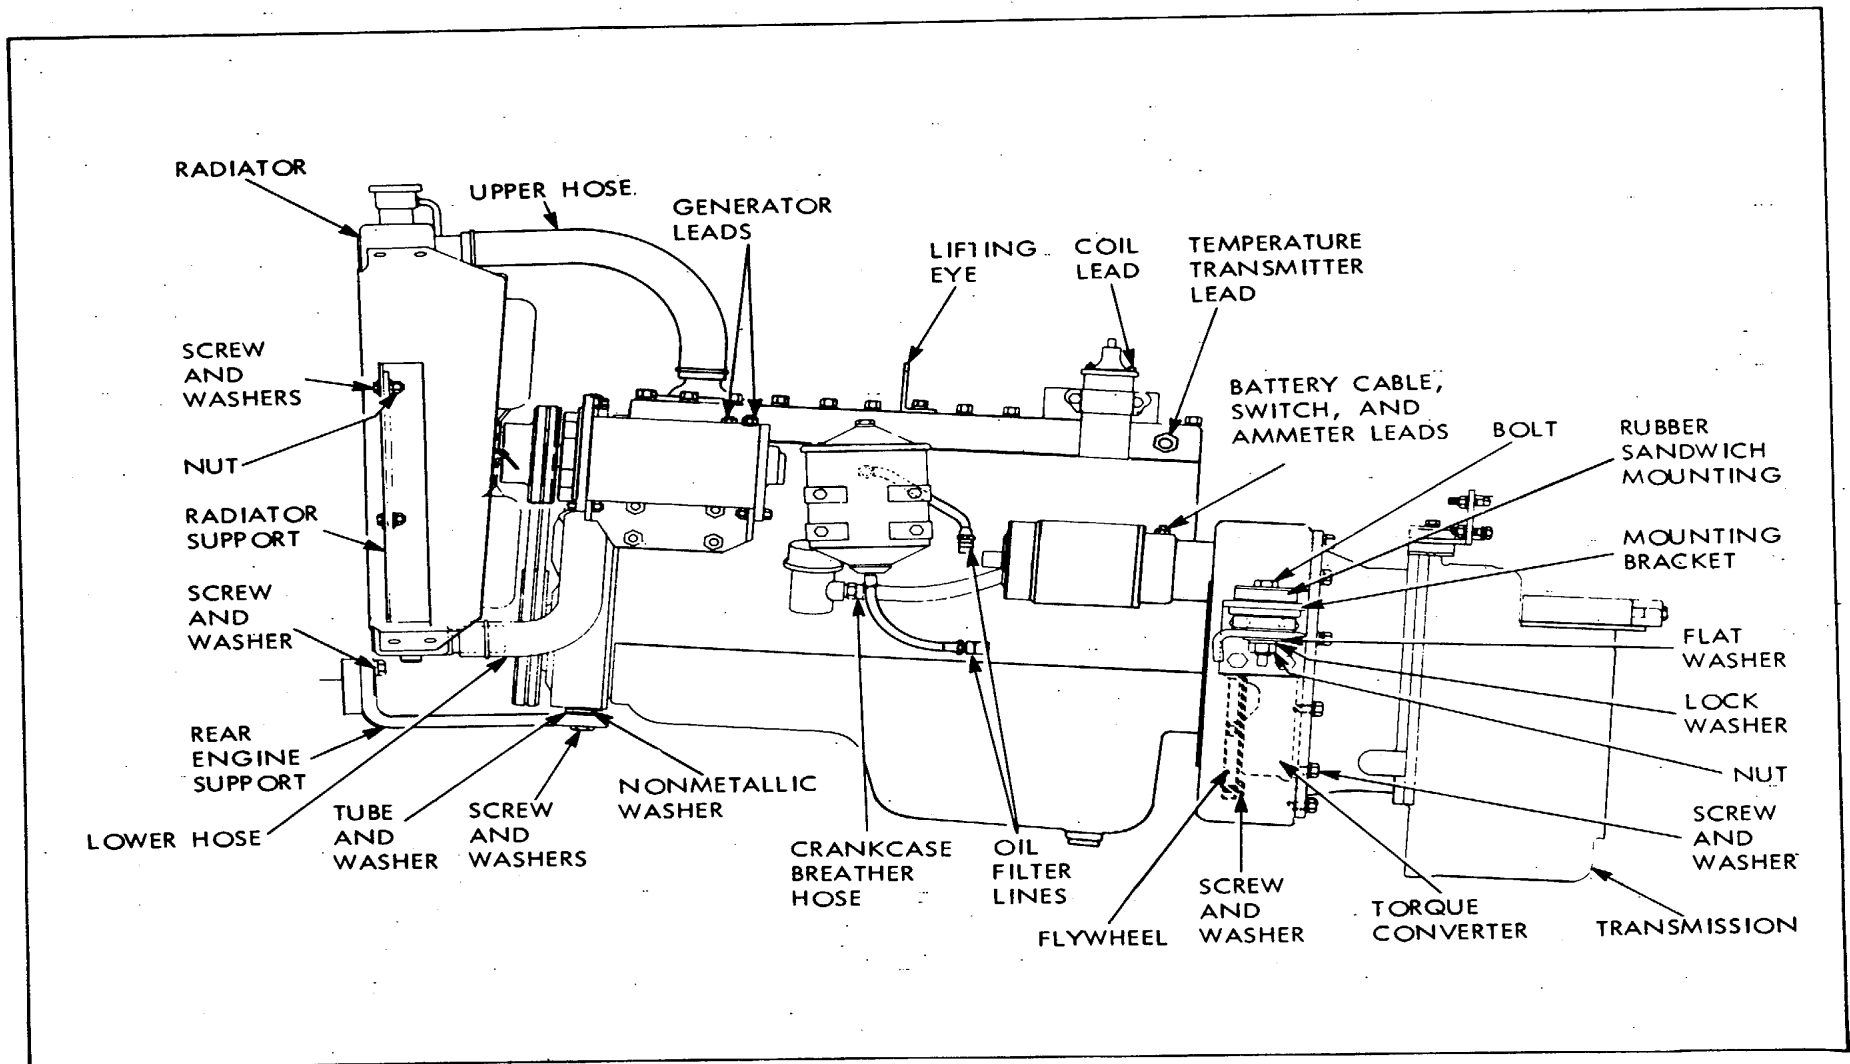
Engine Removal Check Points (Sheet 1 of 2)
